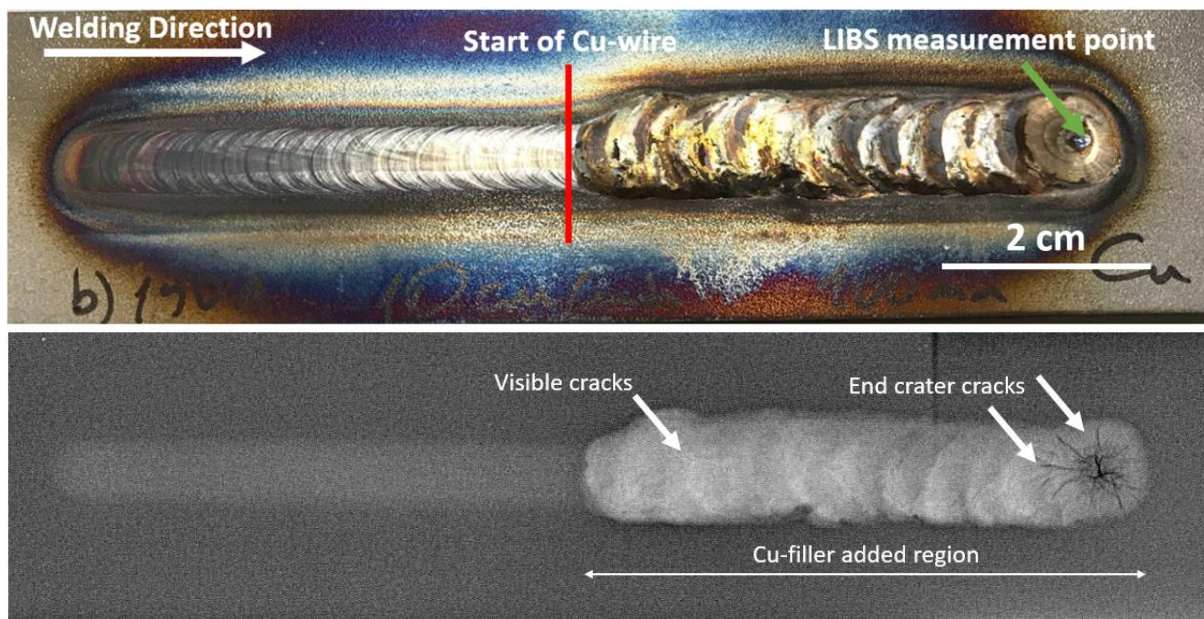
Top view of the completed weld bead (b) with Cu wire addition at 50mm. The radiograph of the completed weld is shown below the weld picture.
